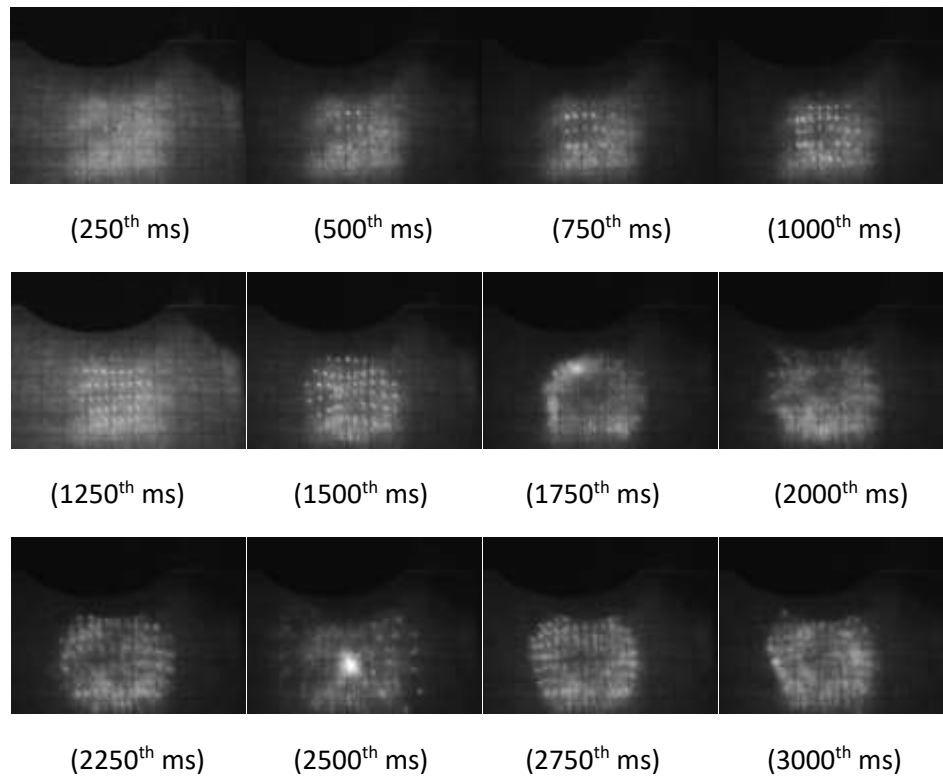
Active weld pool reflection images during a welding. The weld pool and penetration increase as the time increases. [104, 149]
